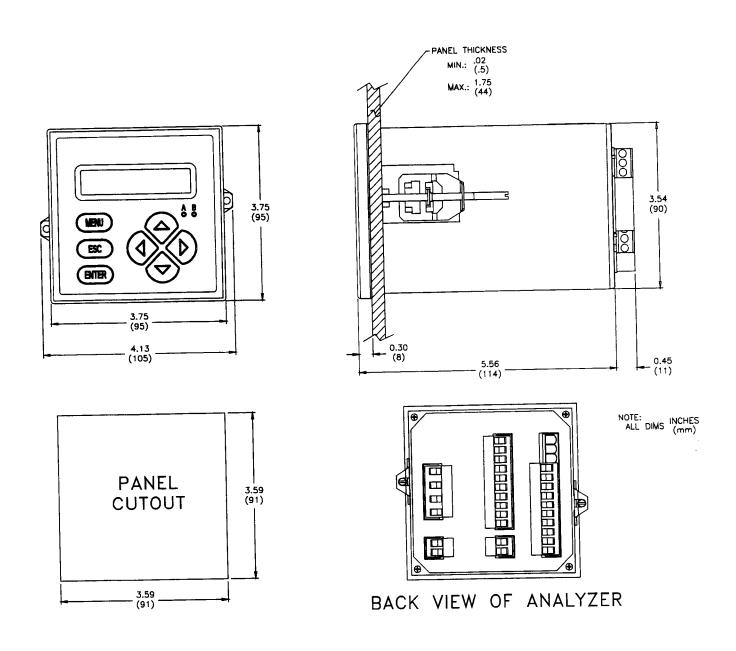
Analyzer Enclosure Dimensions and Panel Mounting Details
